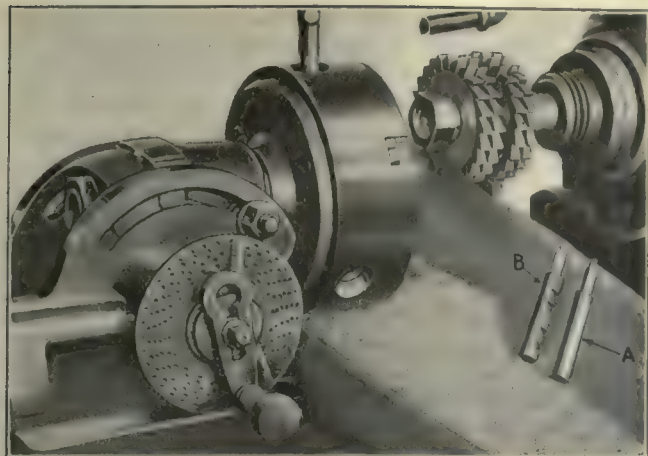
SET-UP FOR VALVE MILLING OPERATION
